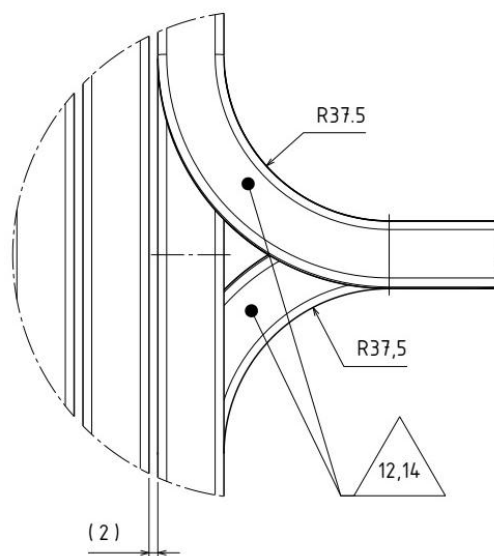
Detail of Inspection areas in technical drawings of PF1aL
